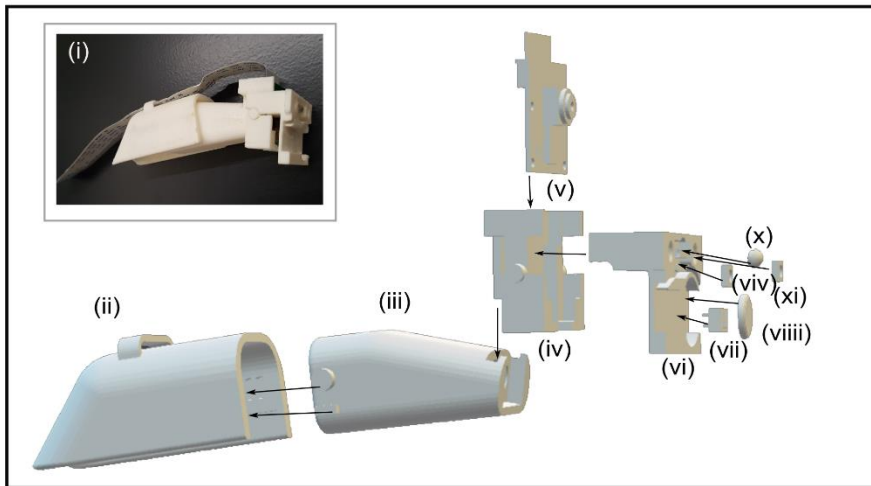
5: Thimble imaging prototype and components. i) Printed side-view of the thimble design prototype with camera and an optical lens attached, ii) proximal brace, iii) front brace, iv) back holder for the raspberry pi camera, v) The 3D model of the raspberry pi camera, vi) front holder of the camera that has the option to support optical lens and illumination, vii) a switch to control illumination, viii) a coin battery to supply power for the illumination, ix, xi) Two neopixel LEDs (5mm × 5mm) with integrated control, and x) A moldless lens for magnification.
